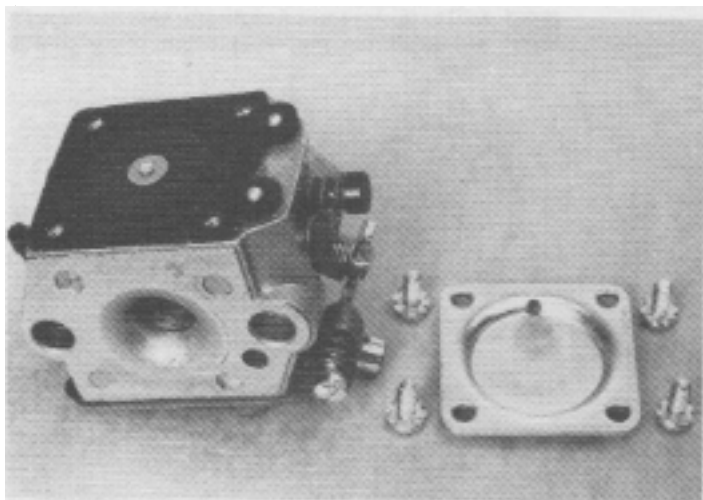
Assemble the metering gasket next to carburetor body. Assemble the diaphragm on the gasket. Be sure there are no wrinkles in the diaphragms.
